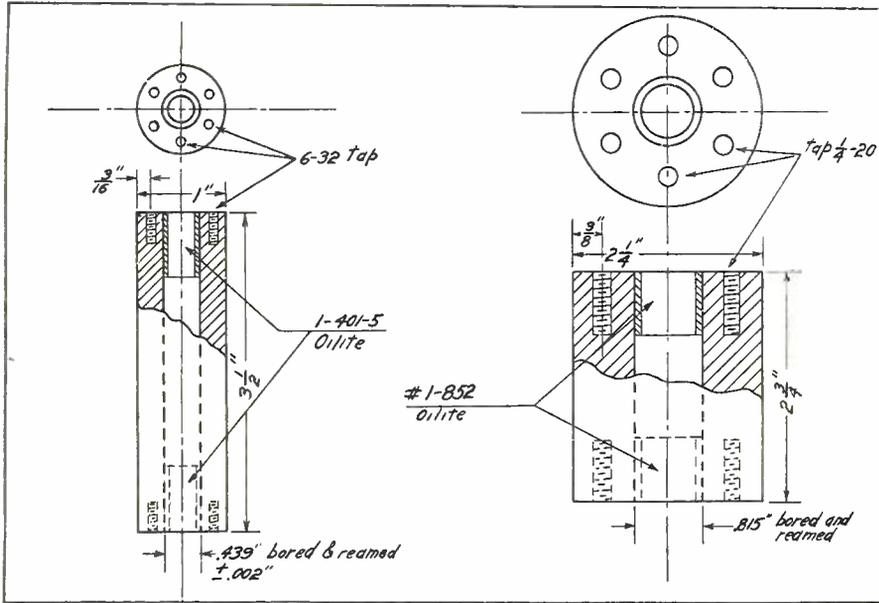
Details of the bearing assembly. Tolerances must be kept close.
